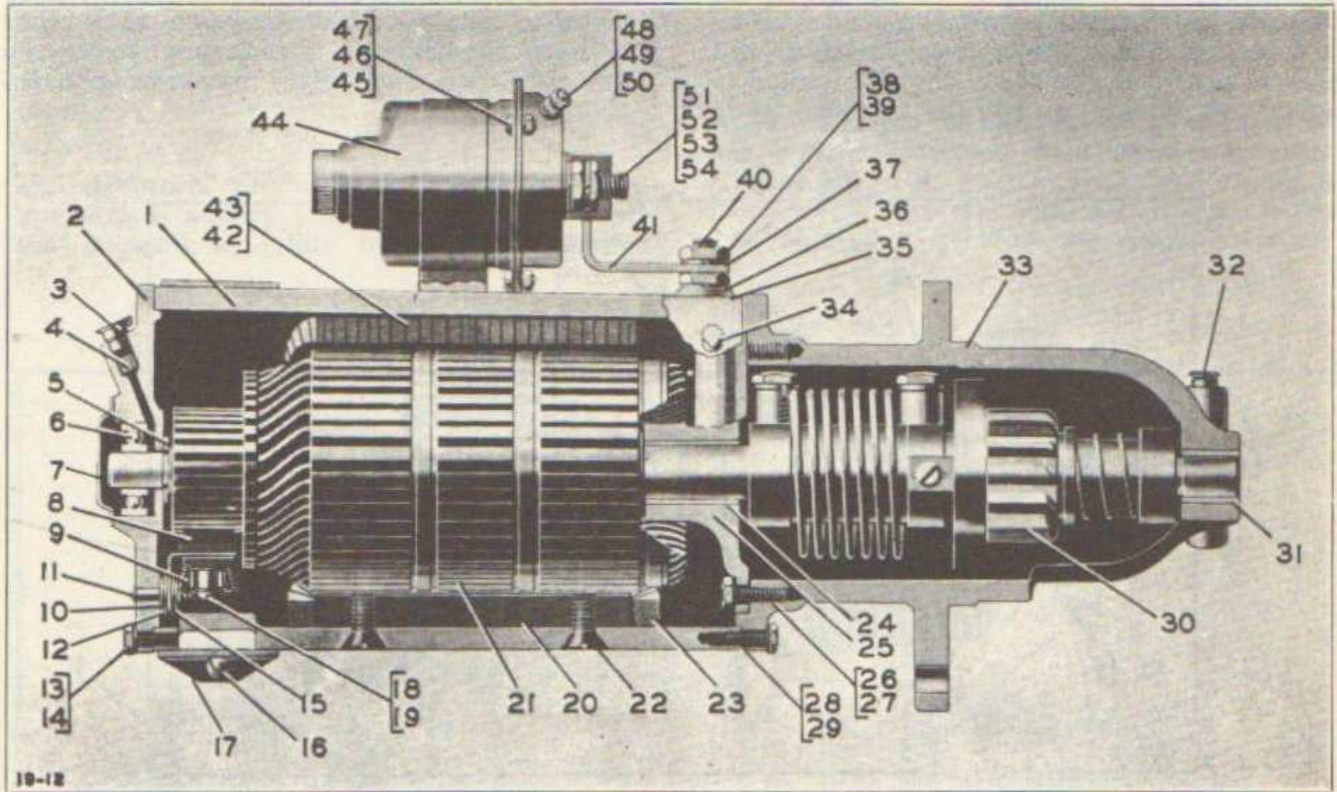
Sectional View of Starting Motor and Magnetic Switch
